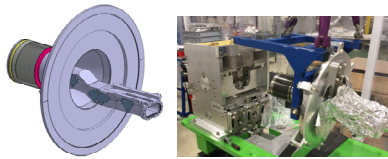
Illustration of cooling shaft & picture of its assembly on the mechanism.
